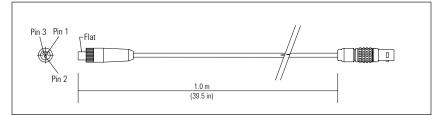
Mechanical dimension for power probe bias cable (87405C-102)
